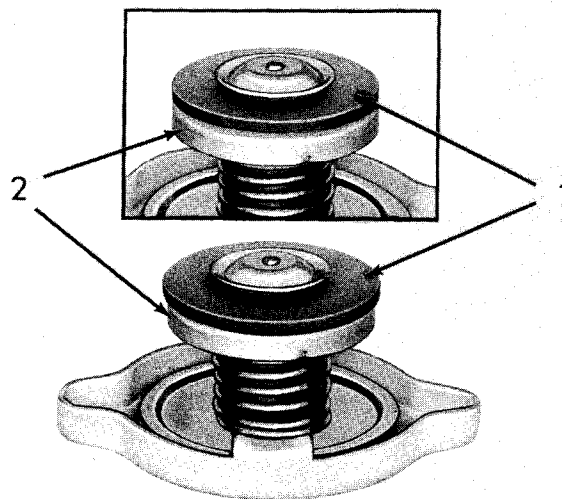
• 1. RUBBER GASKET 2. BRASS SPRING SEAT
